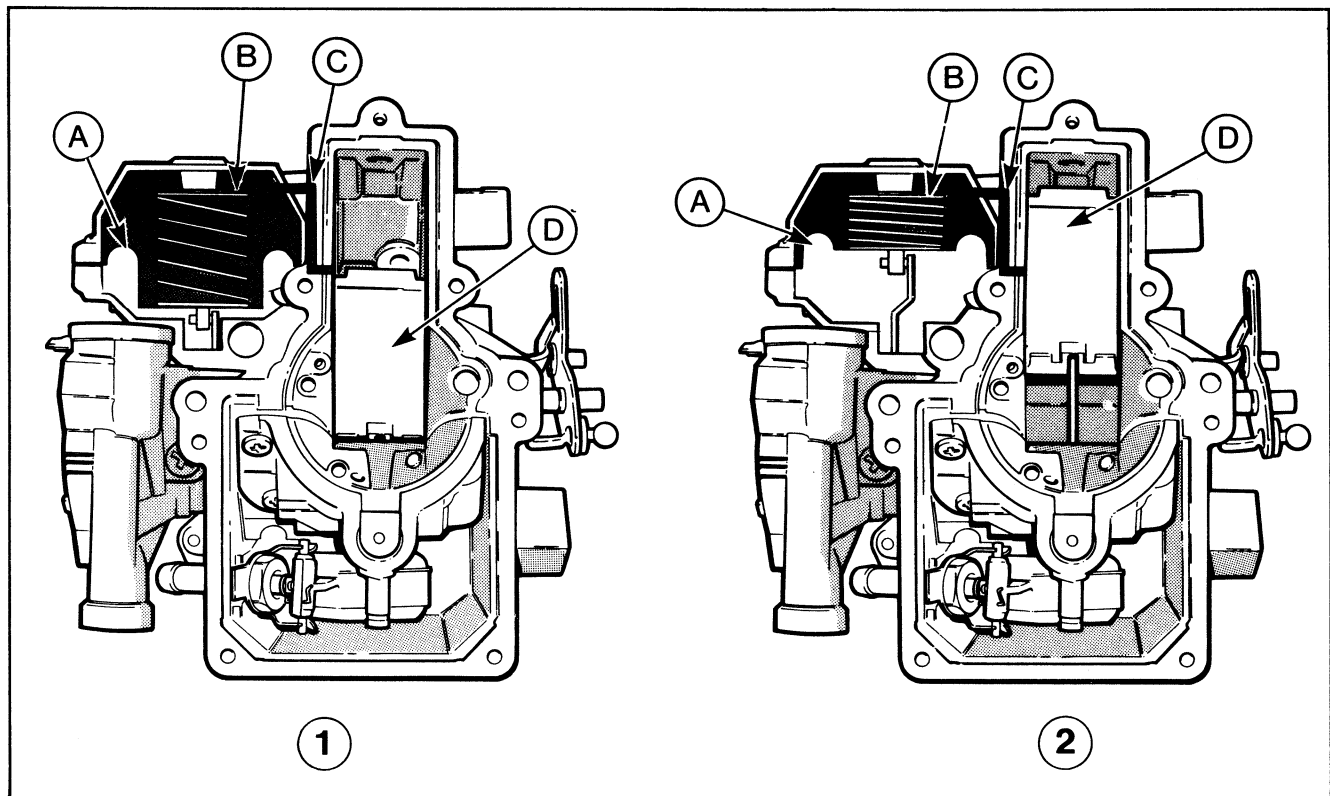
Two Extreme Conditions of Air/Vacuum Control System, Showing System at Idle (1) and at Full Throttle (2)
